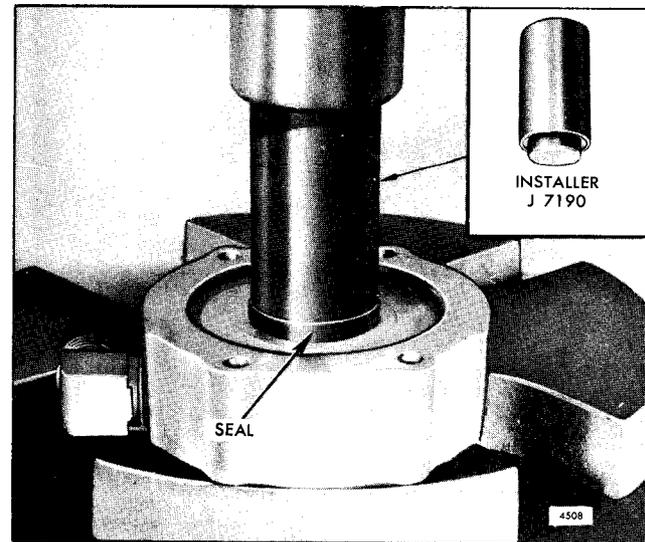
Installing Hydrostarter Shaft Seal in Valve Plate
